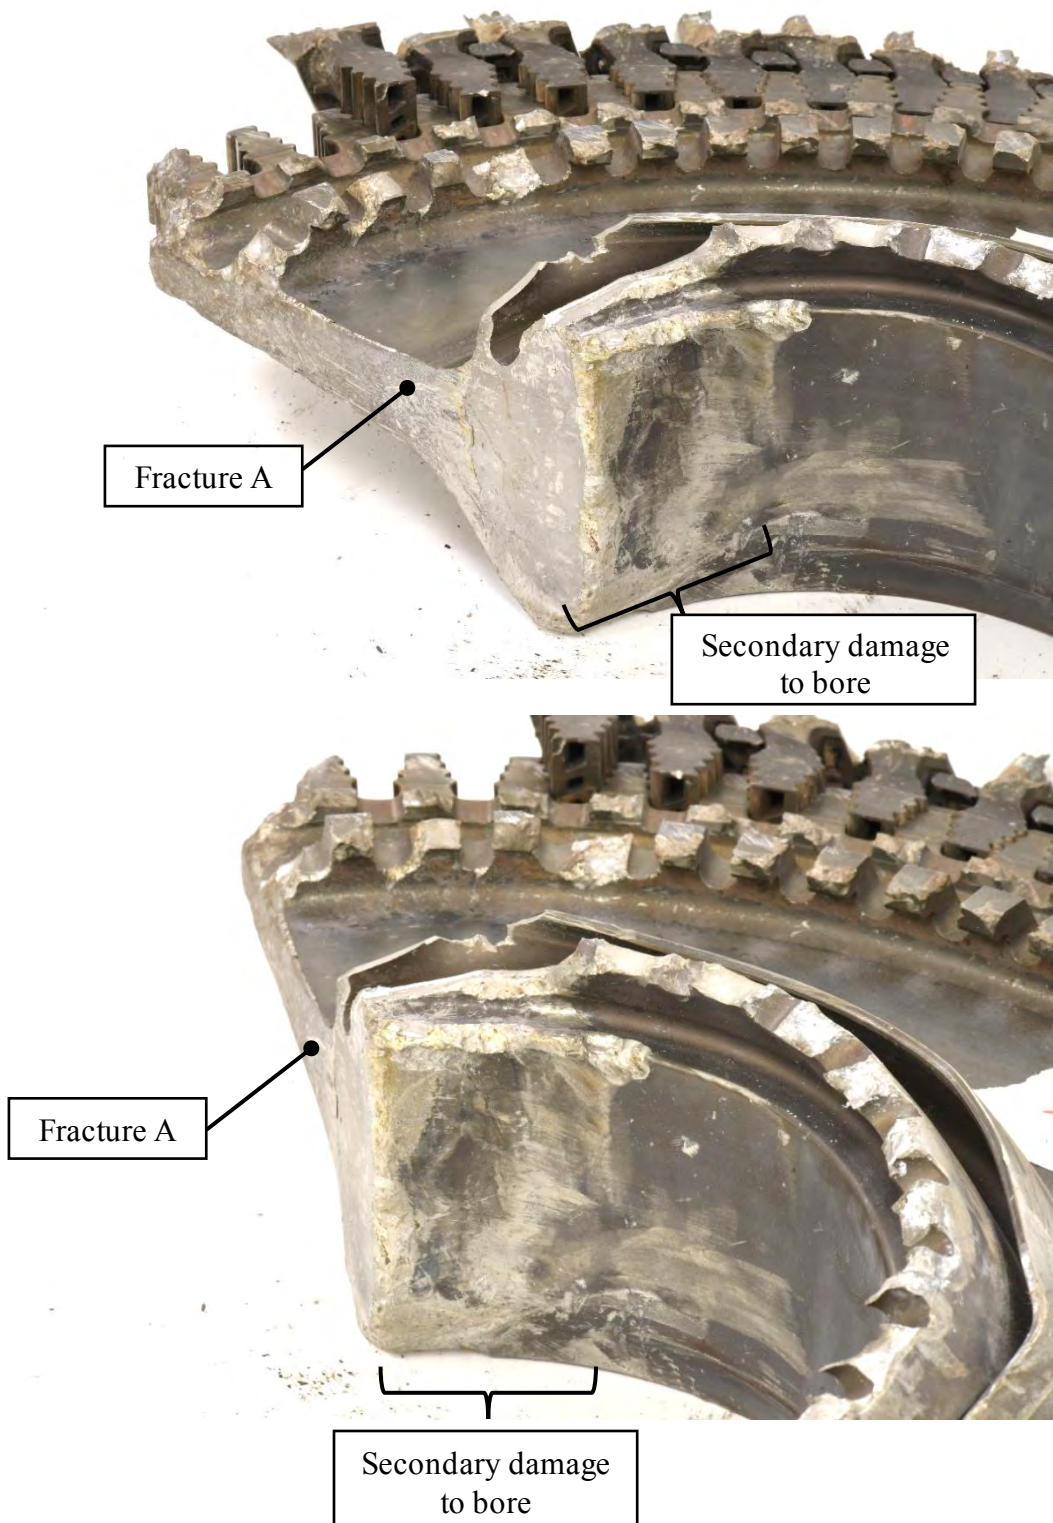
Images showing damage to the bore and hub section at the Fracture A end of Fragment 1.
